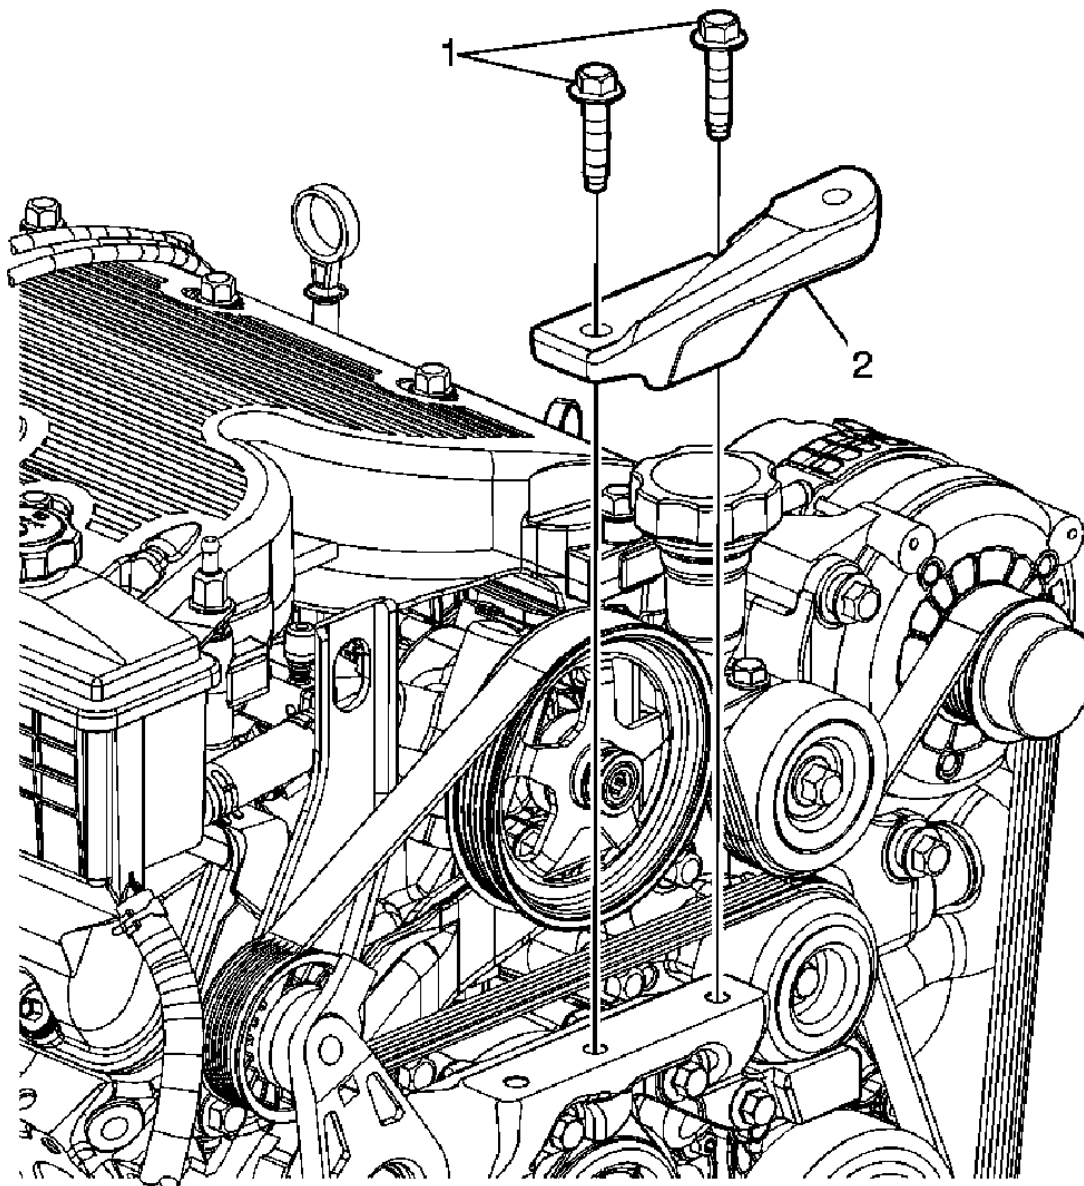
Engine Mount Strut Bracket (Strut Side)
